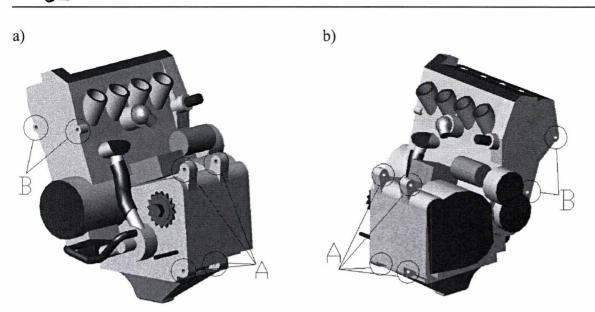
CAD layout Suzuki GSX-R 600 a) left side b) right side
